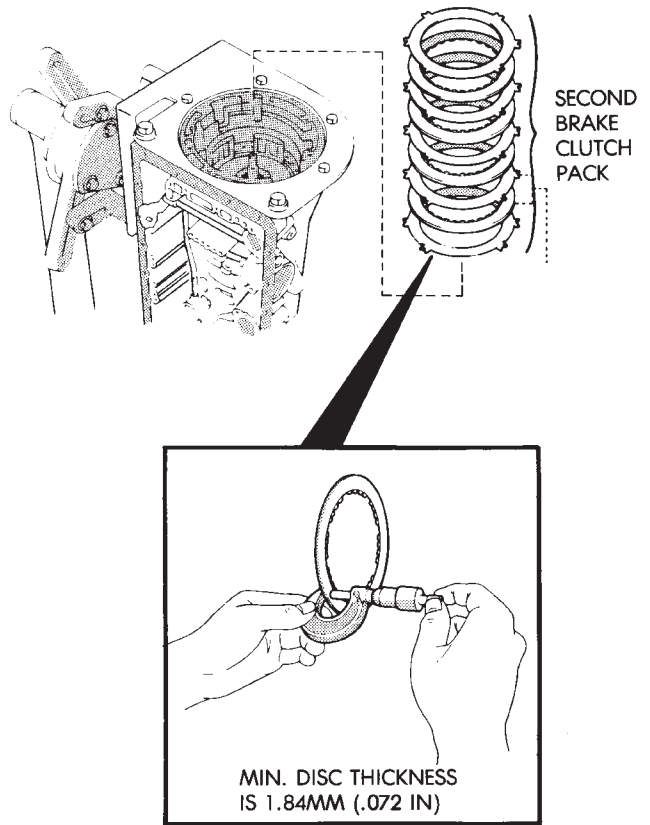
Remove/Measure Second Brake Clutch Disc Thickness
